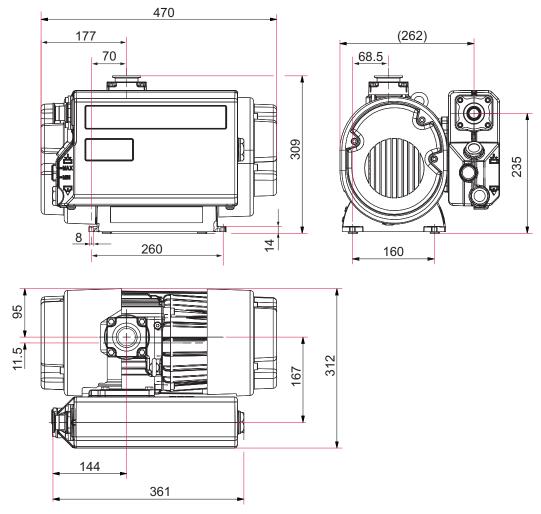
Dimensions of SmartVane 70 Dimensions in mm
